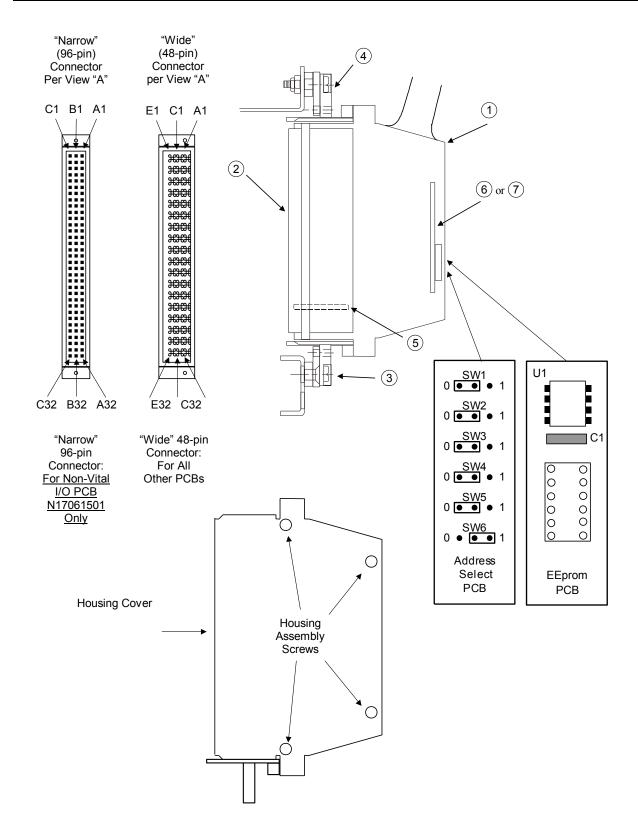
PCB Wiring Connector Mounting and Integral Address Switch Board
